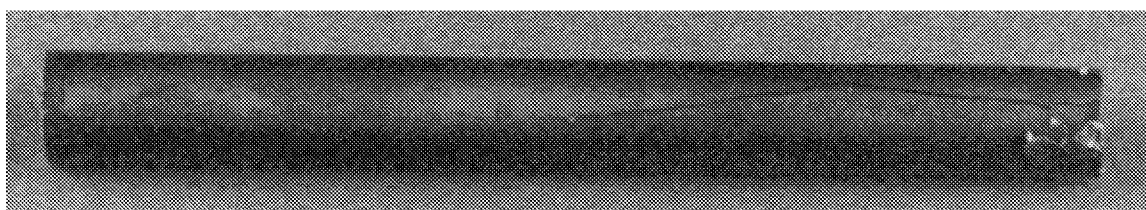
Photograph of MoSi₂(Ge) coated PM Mo-47.5Re tube after PyC/SiC deposition (#23). (Outer tube diameter is 0.197 in.)
